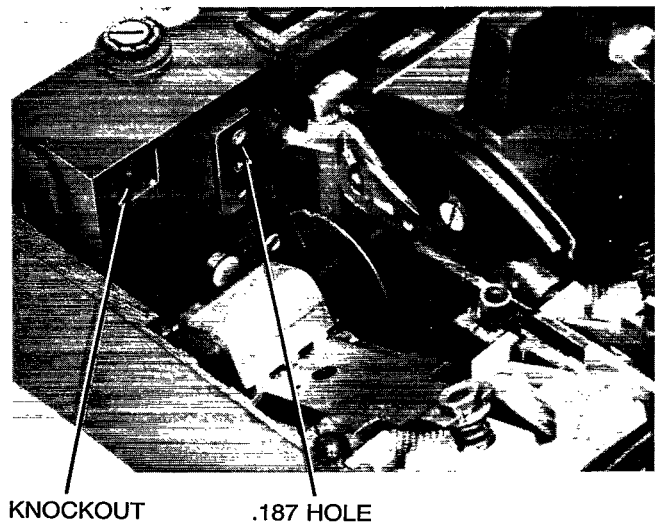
Location of the knockout and the hole to be enlarged in the trip unit housing.
